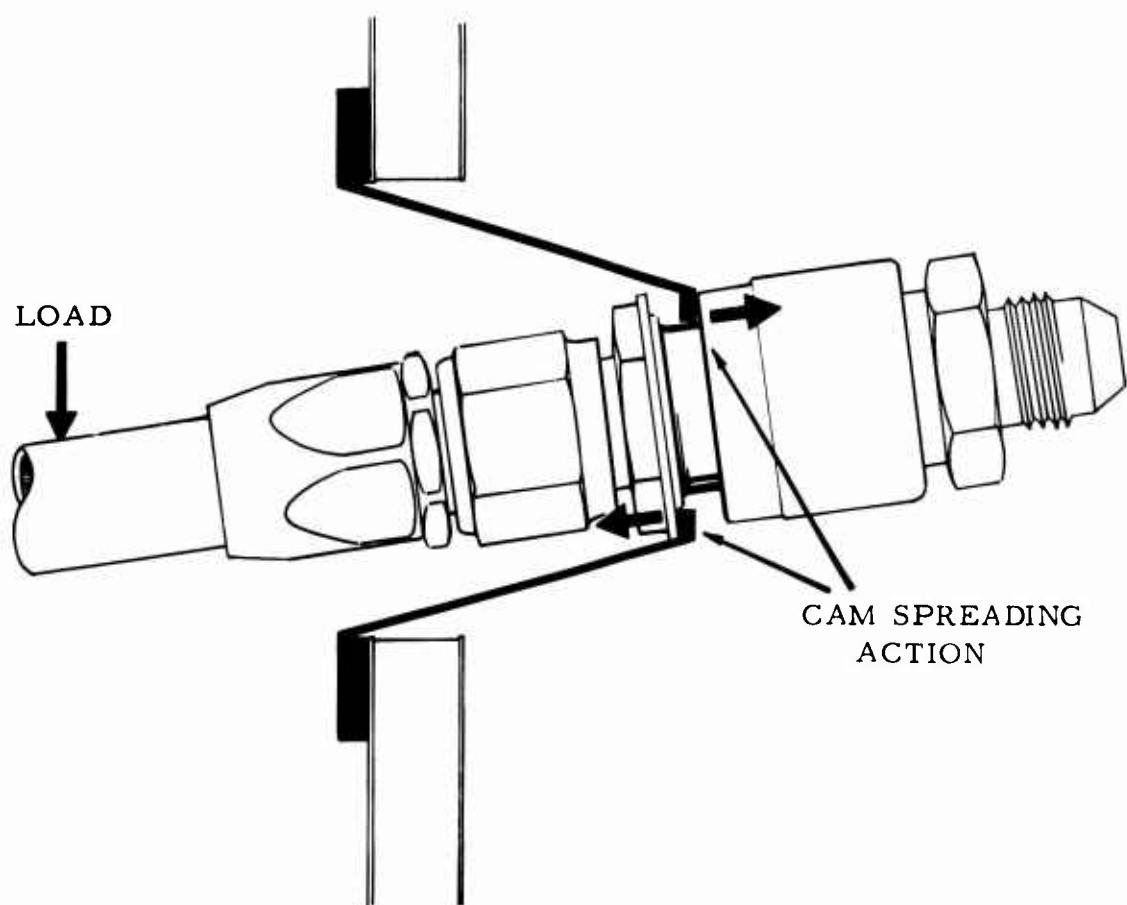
Rigid-Mount Triggering Technique Used During Lateral Load Displacement.
